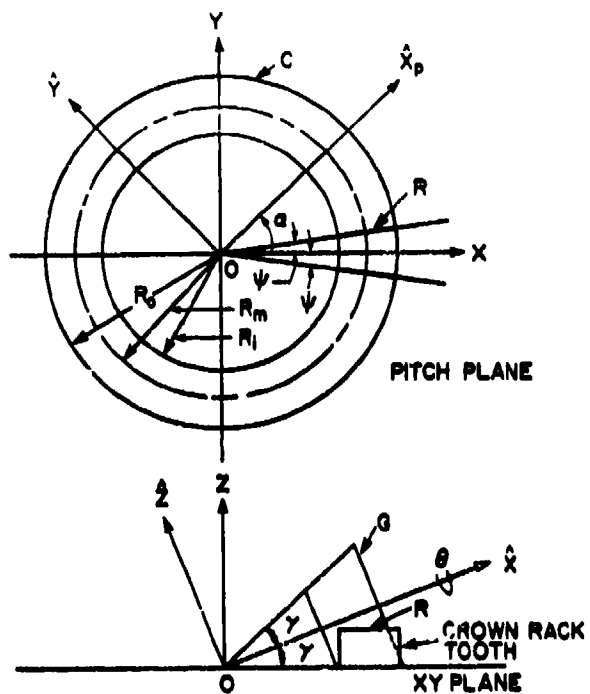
Straight Bevel Gear Tooth Surface Generation
